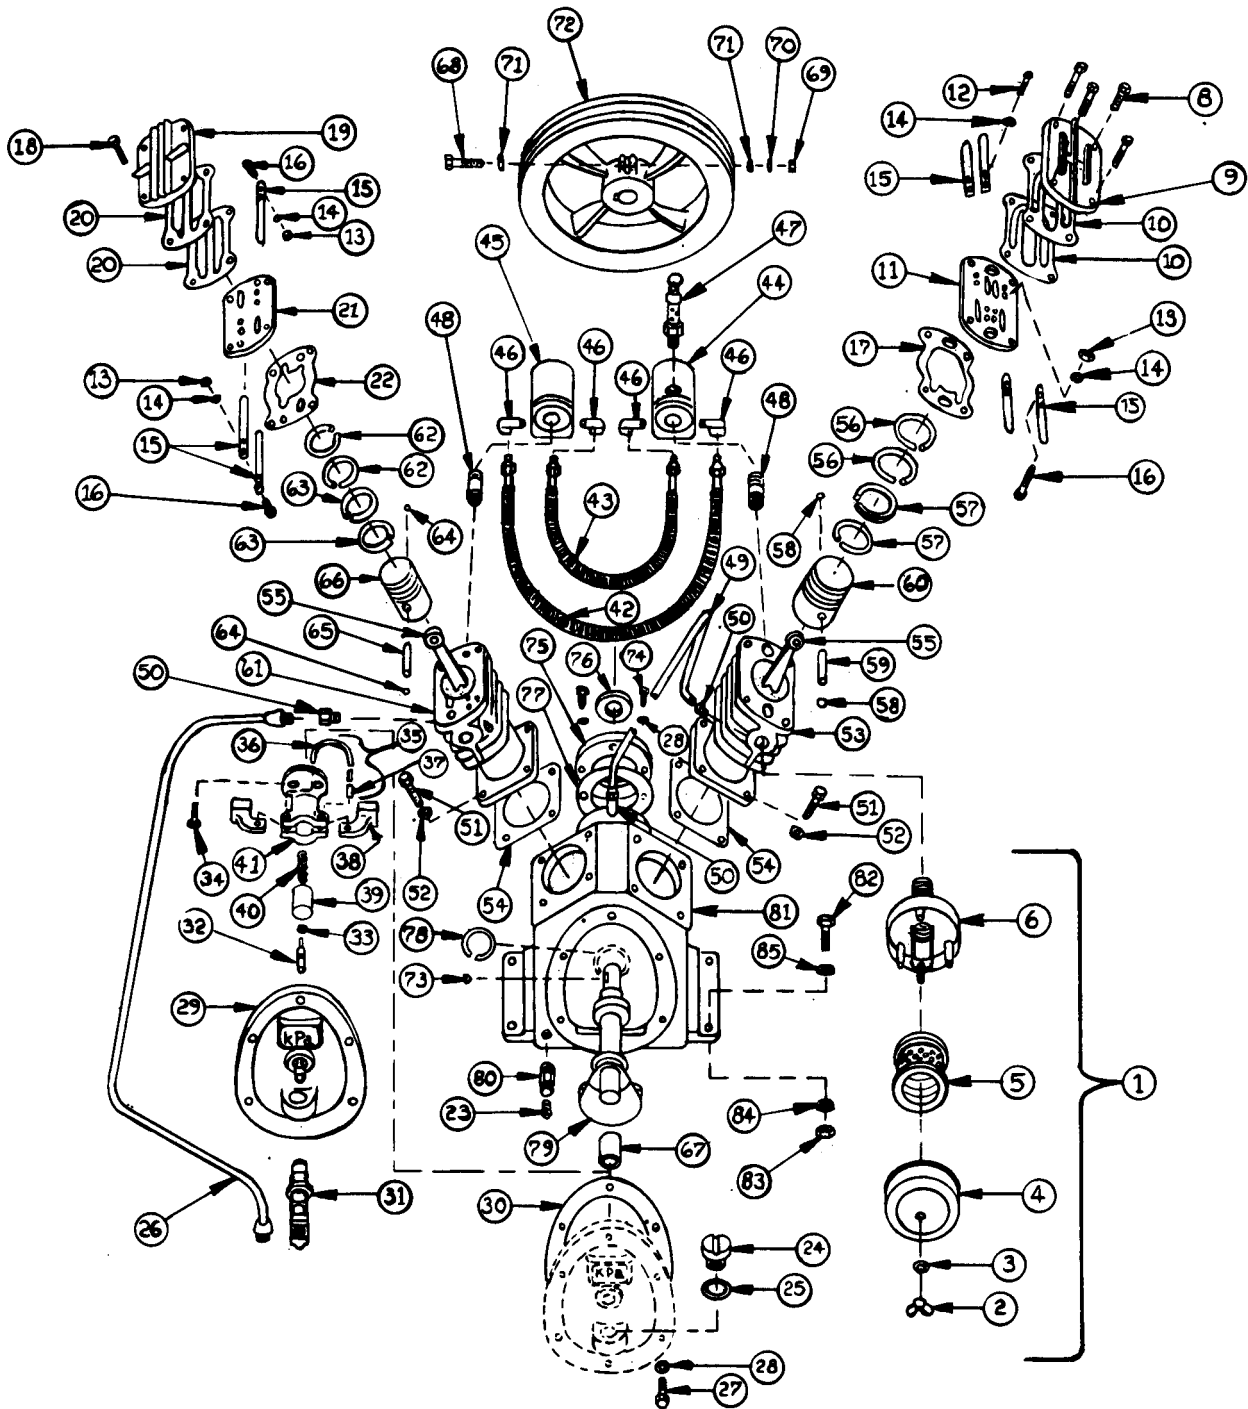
Inlet Air Filter, Cylinder Head and Valve Maintenance Group
